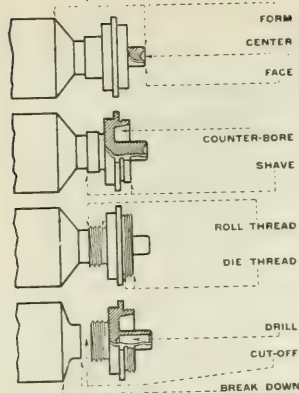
SHOWING HOW THE PART IS COMPLETED.
